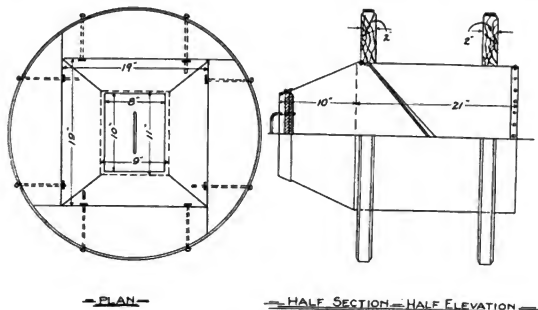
DETAILS SHOWING CONSTRUCTION OF SMALL ROLLING MIXER.
